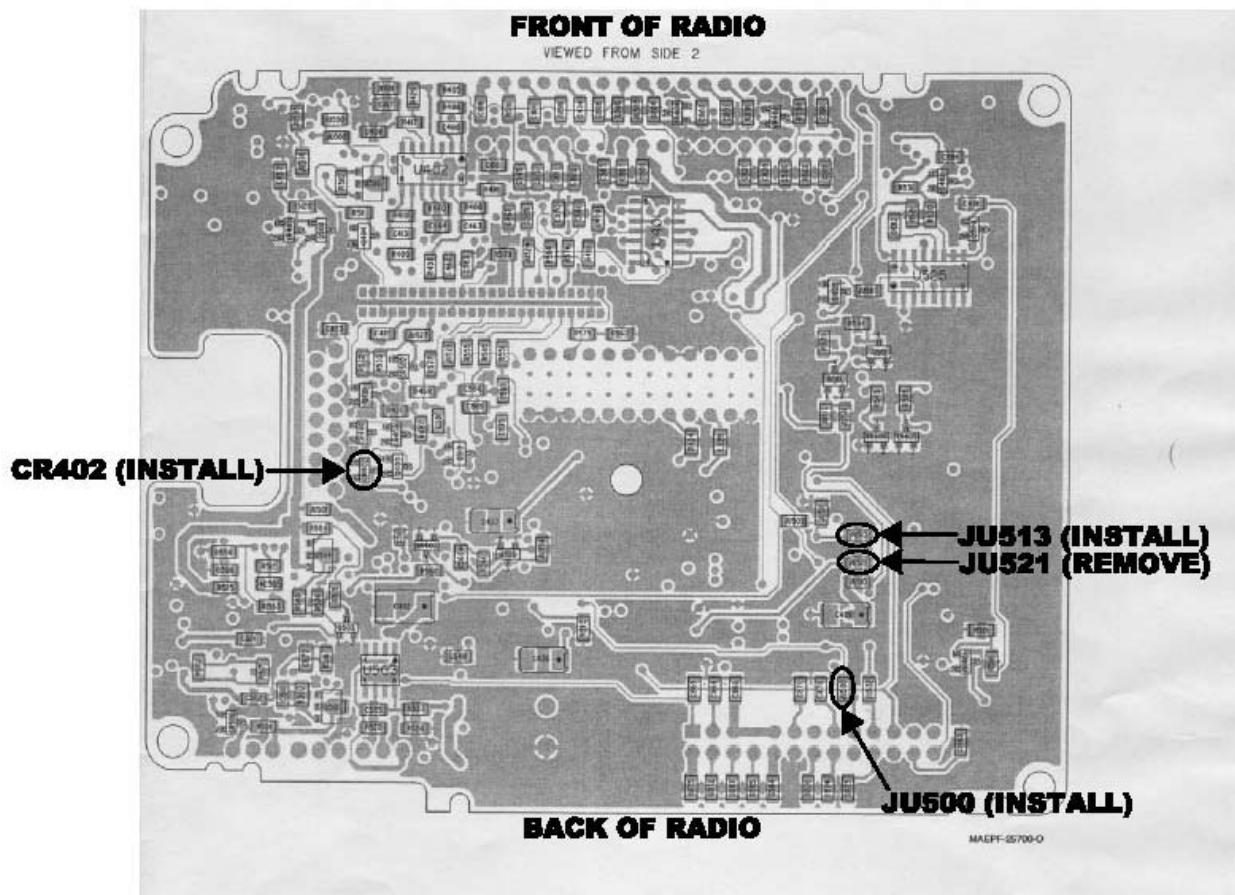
COMMAND BOARD – BOTTOM VIEW
